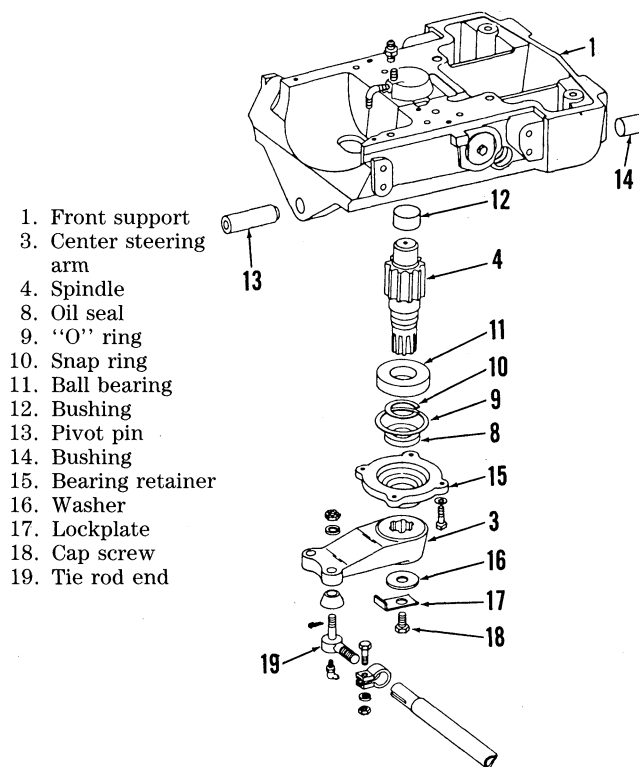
Partially exploded view of front axle support assembly used on 4050, 4250 and 4450 tractors. Support assembly used on 4650 and 4850 tractors is similar.
